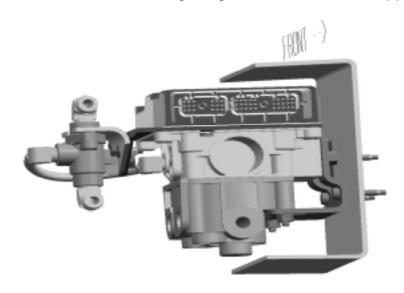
View of Assembly with Bracket Kit Installed (8900083R91)
